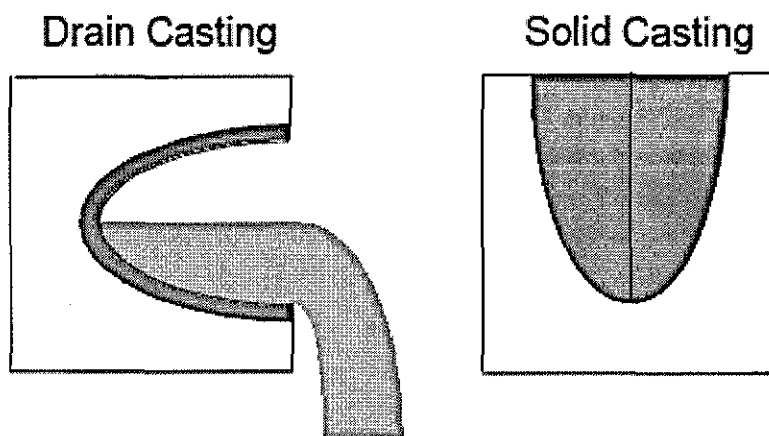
Drain casting and solid casting of ceramics.<sup>134</sup>
